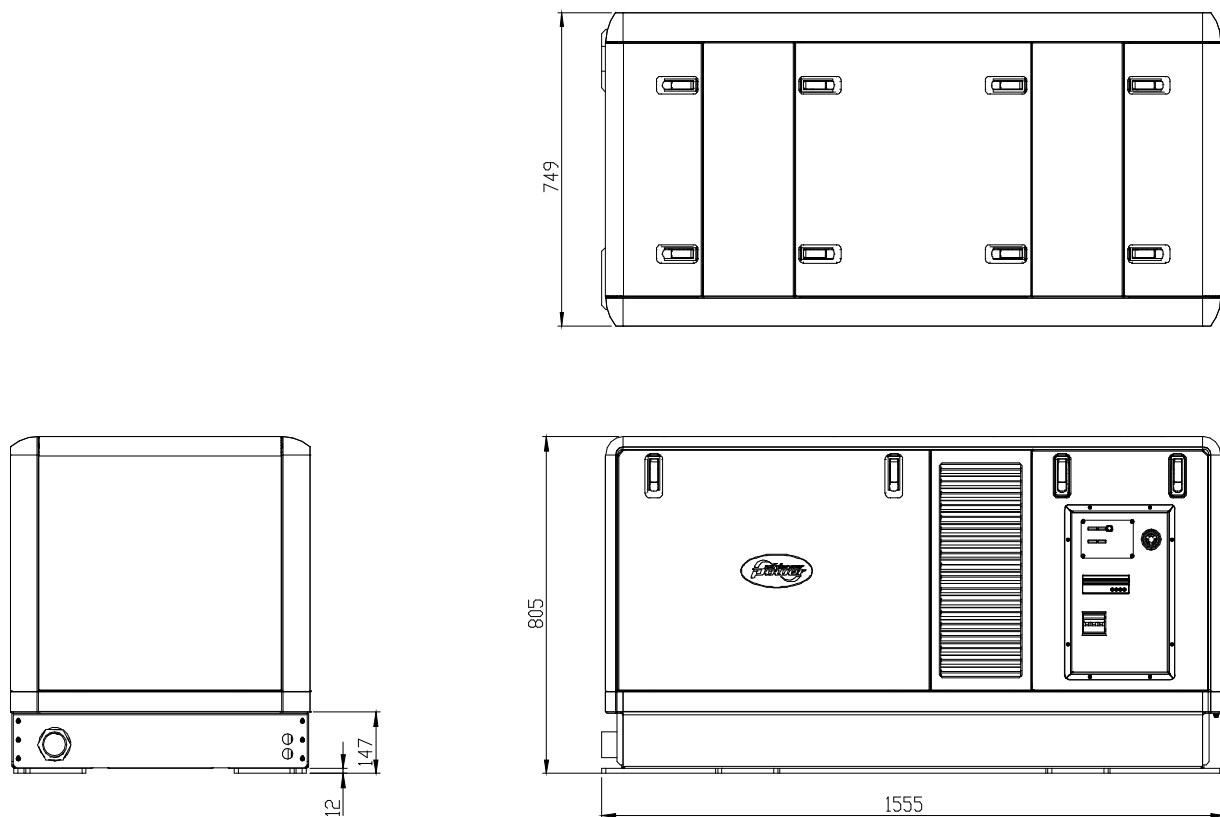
M-SQ 27 kVA / 25 kW dimensions and footprint
